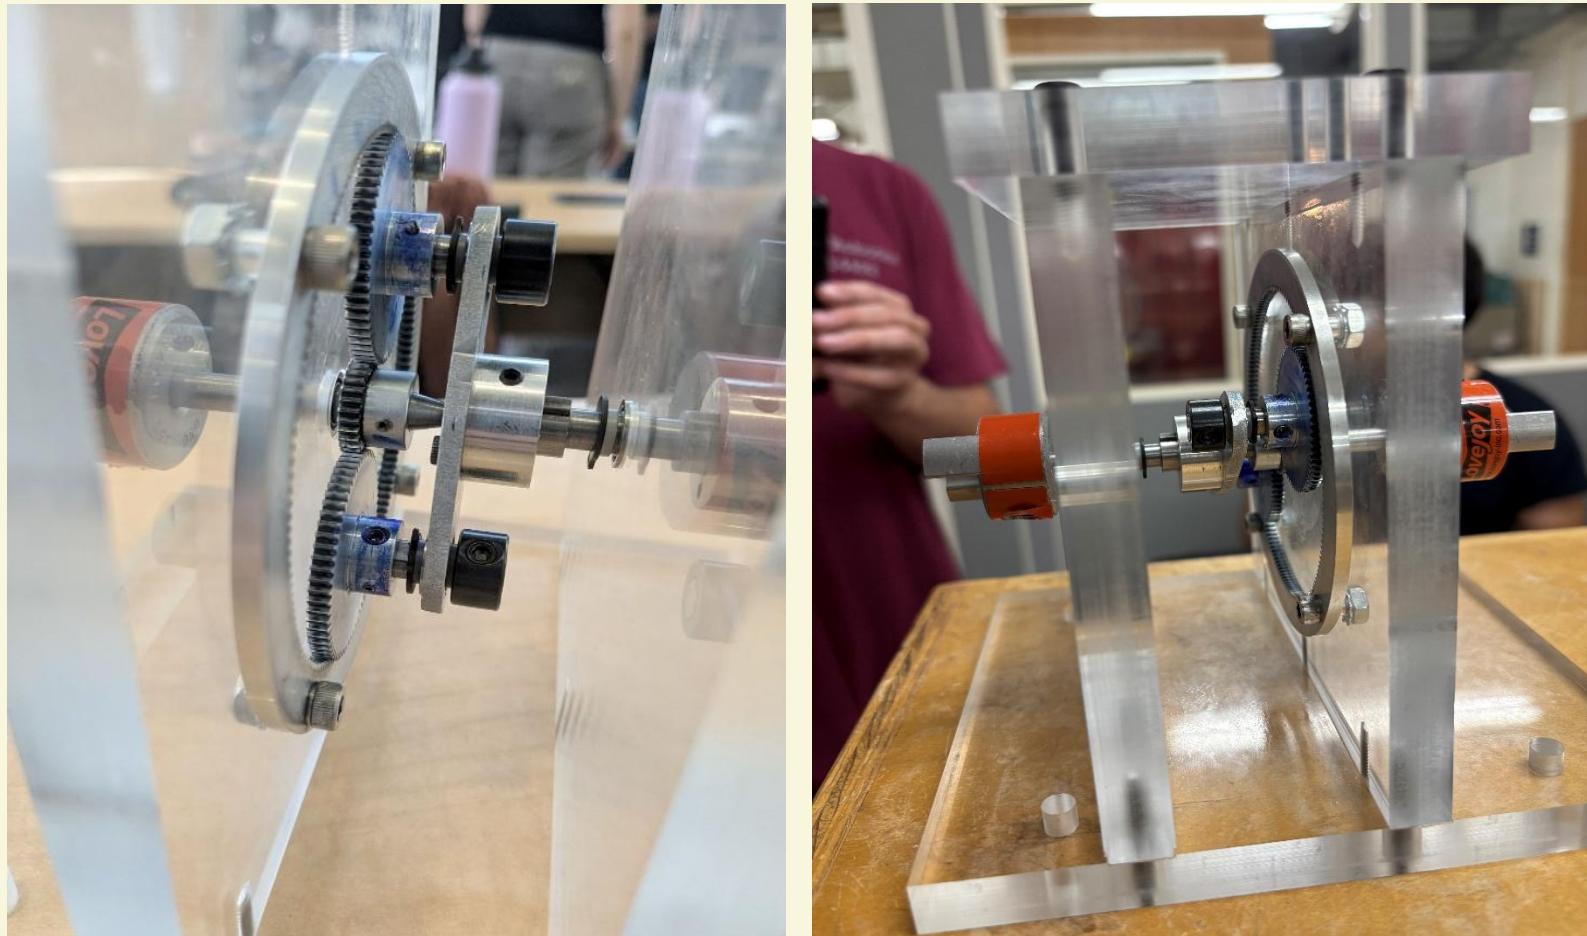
(a) and (b) Complete Setup of the Planetary Gear System in between the two acrylic plates with couplers connected to the ends.
